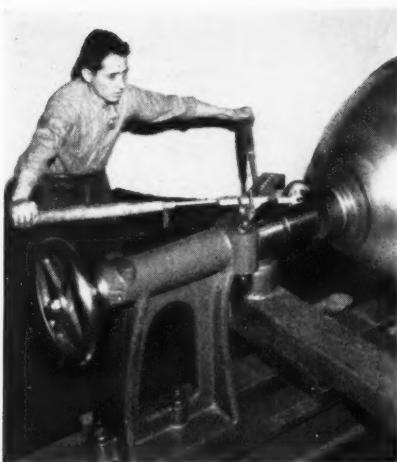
Operator is shown using a compound spinning tool to provide extreme leverage in "flowing" the metal against the spinning chuck with consequent loss of necessary "feel."
